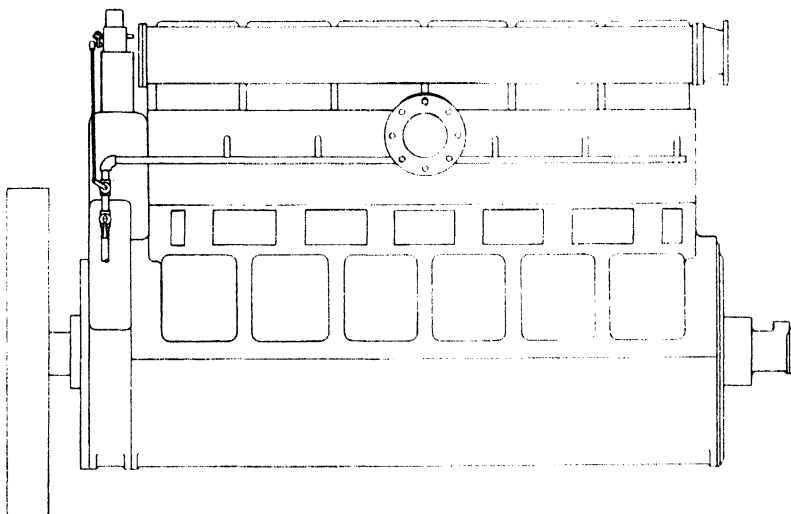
This diagrammatic line drawing of a Diesel engine from the exhaust side shows how the new Cooper-Bessemer dual-fuel development is assembled to the engine. With this new improvement, any engine built as a Diesel can be fitted to operate on gas except spark-ignited gas engines. To convert the oil engine to a gas engine, it is merely necessary to remove the fuel oil system from the governor, set it to the minimum position, and connect the governor to the gas-regulating valve. All this is accomplished automatically by the turning of a valve.
